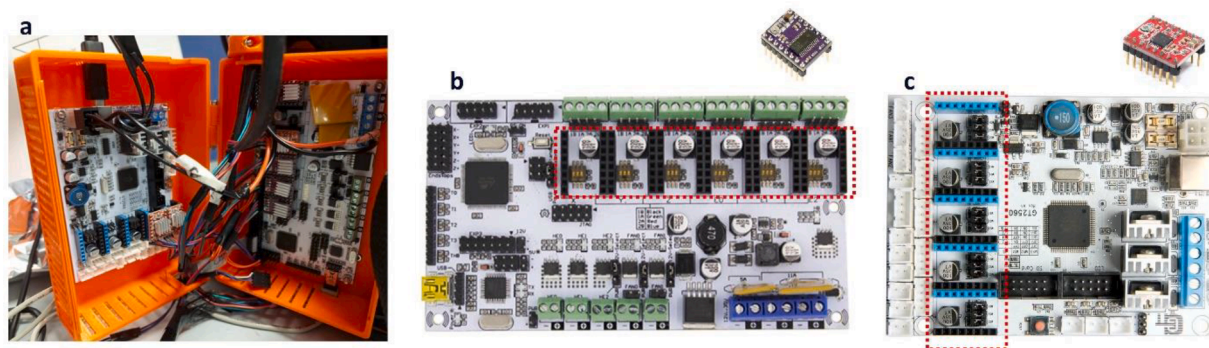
Assembly of the electronic boards in the cable box (a), Rumba board and DRV8825 stepper drivers (b), GT2560 and A4988 stepper drivers (c).
